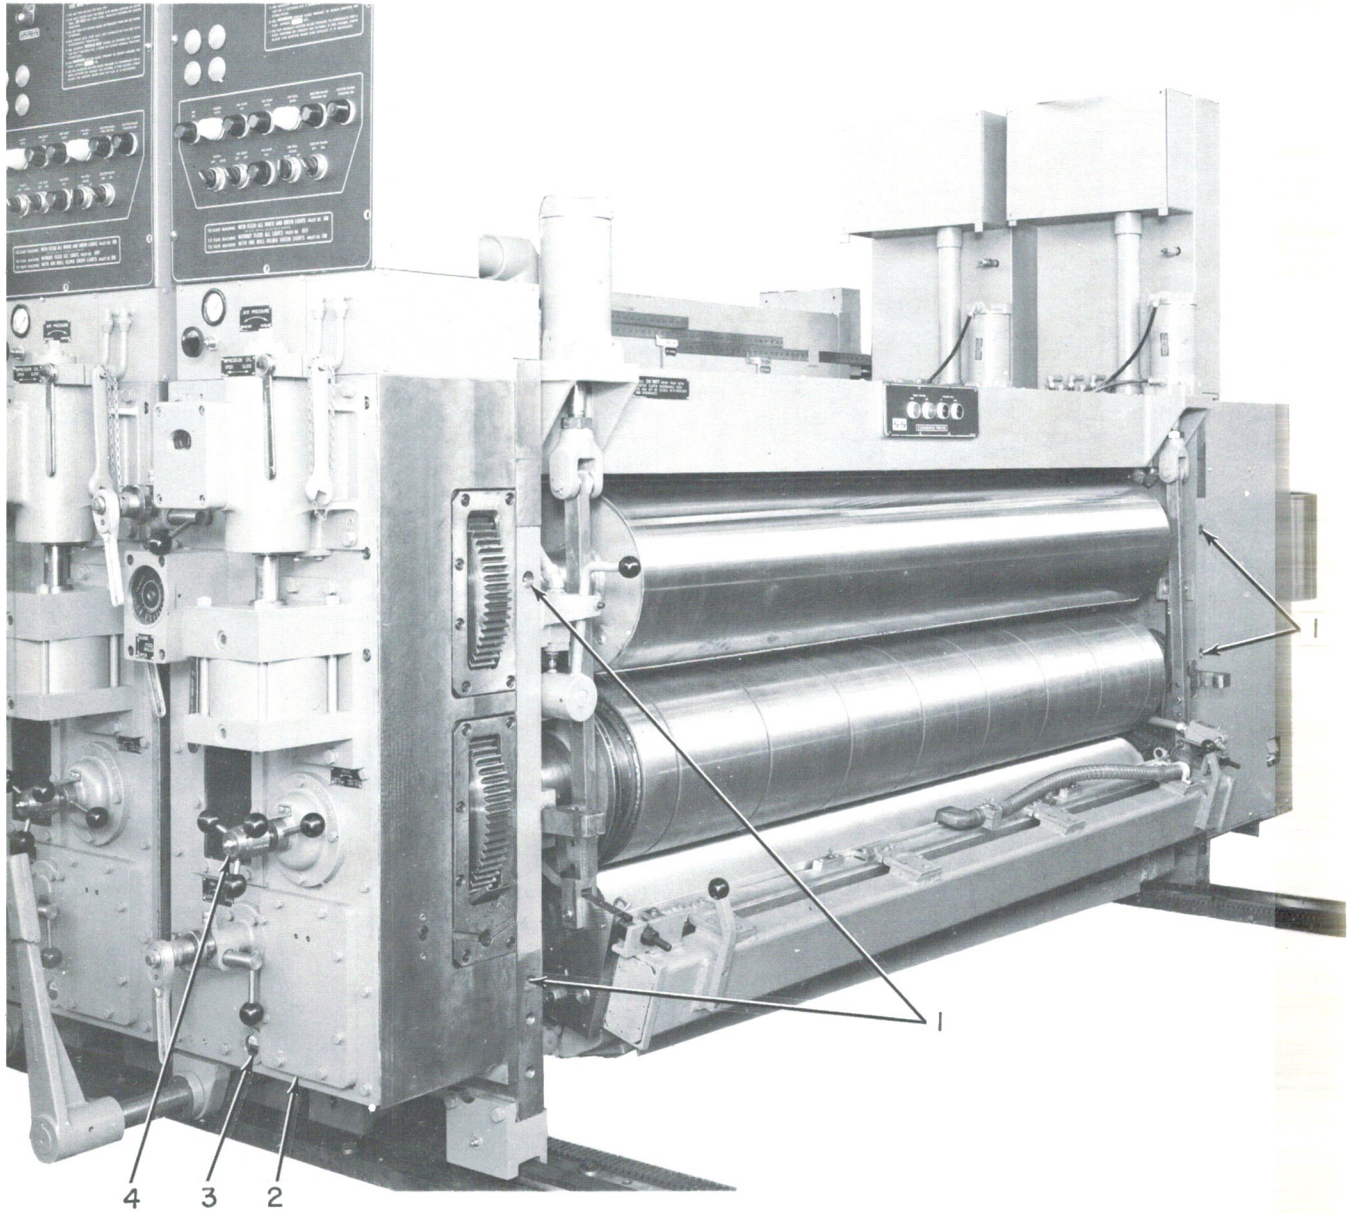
PRINTING UNIT LUBRICATION, FEED END VIEW
